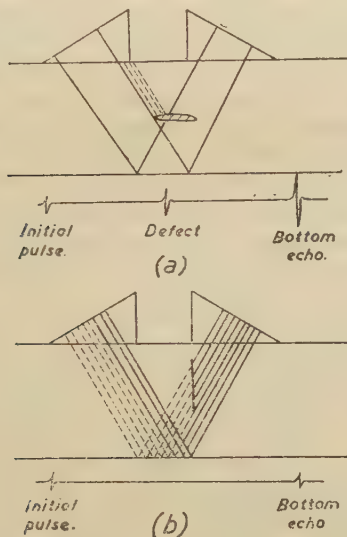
Method of Using 30° Wedges for Detecting (a) horizontal and (b) vertical defects.
